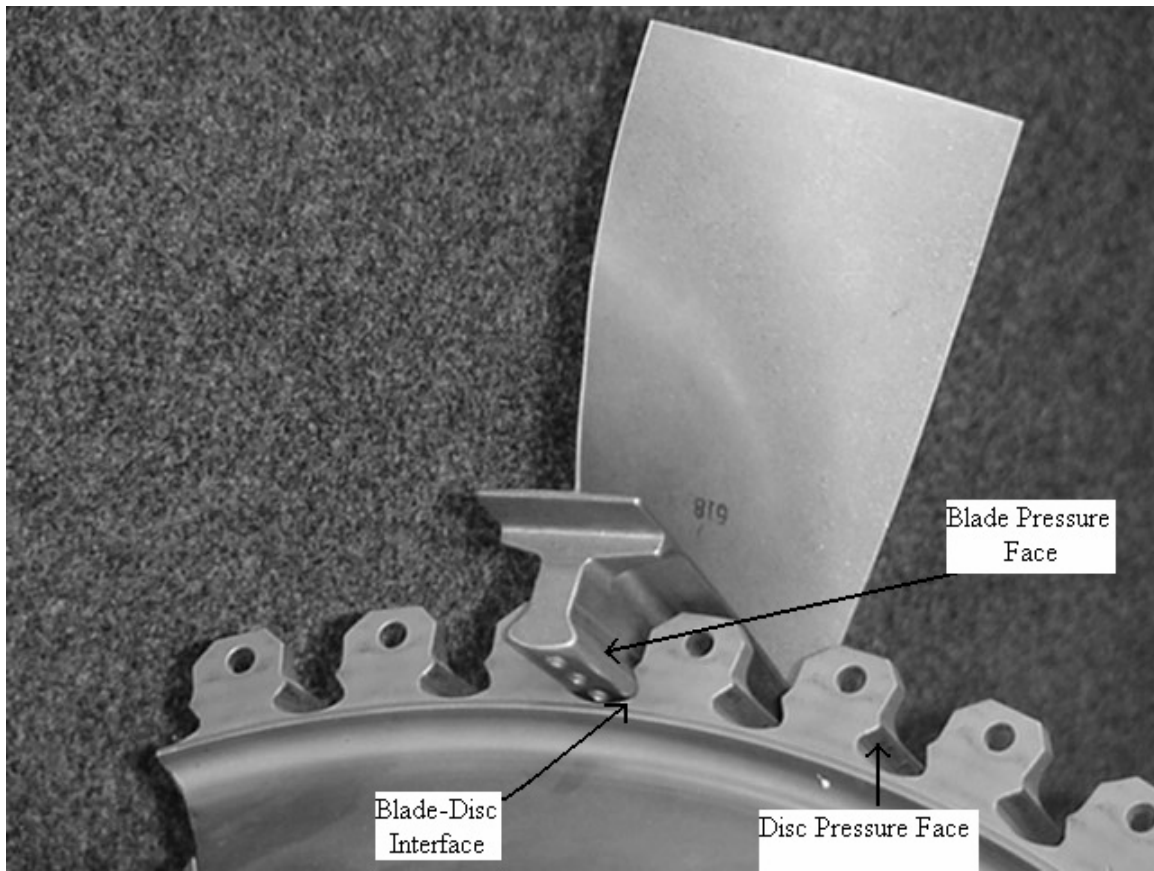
Blade/Disc Dovetail Joint in Turbine Engine.
